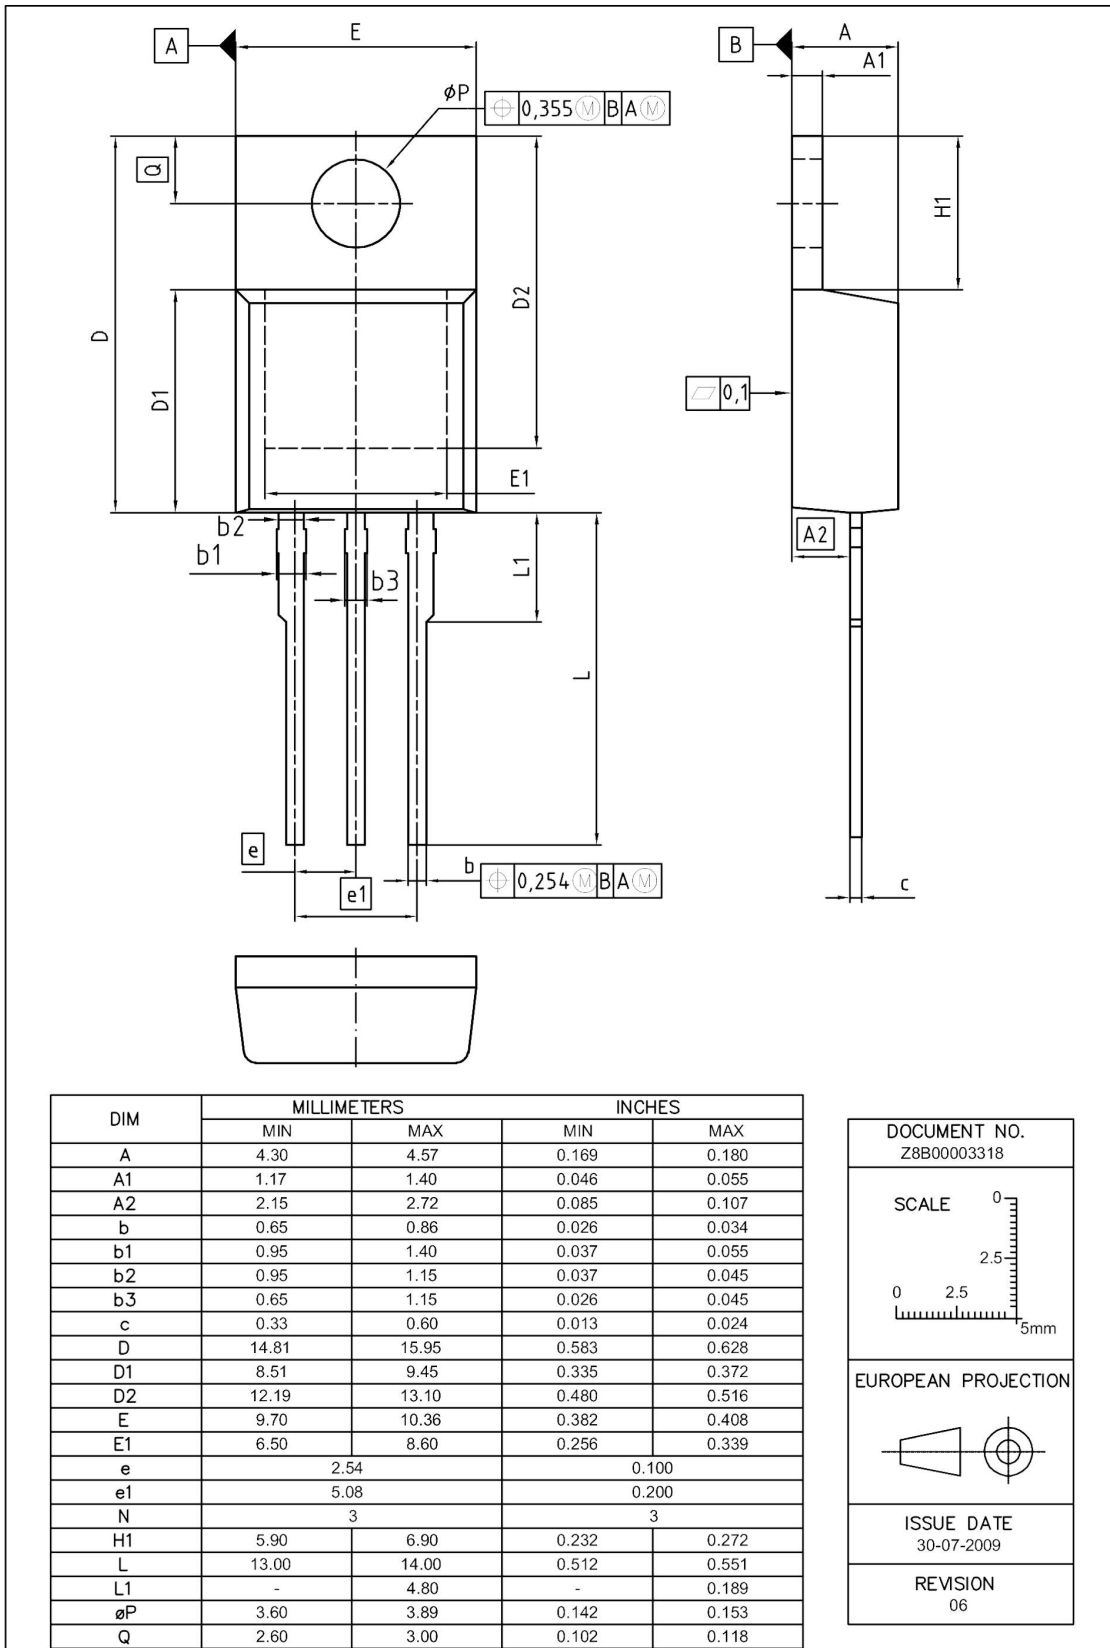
Outline PG-TO 220, dimensions in mm/inches
